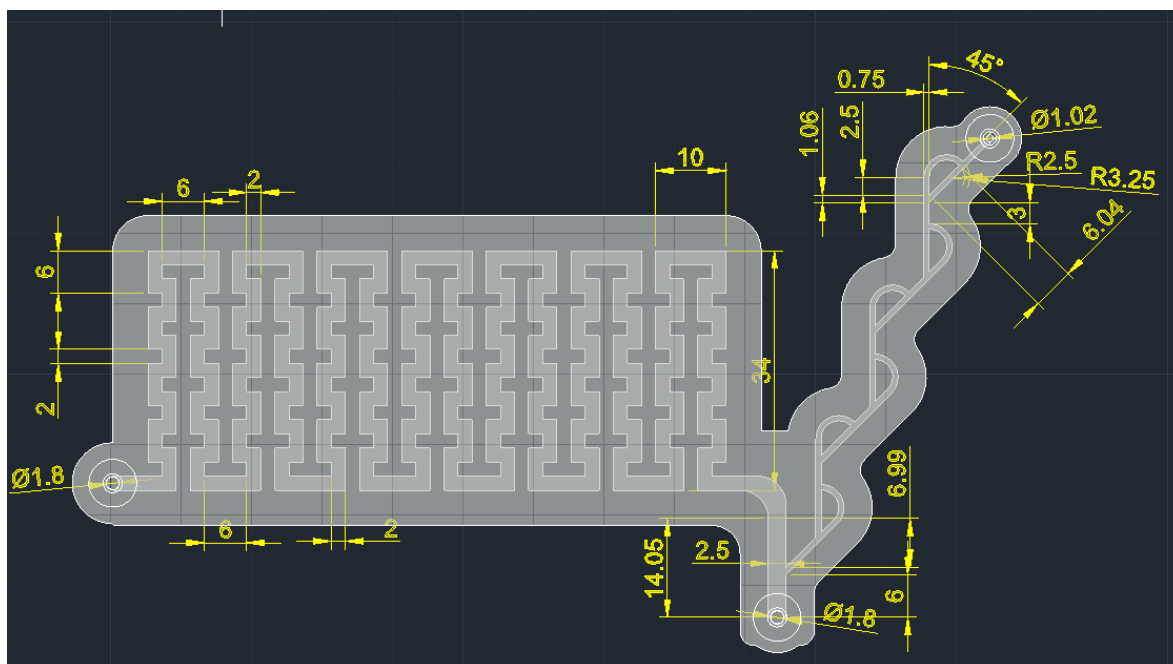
Dimensional labeling of the disperser [47] with a height of 1 mm with Tesla valve in CAD The units for the dimensions are in millimeters.
